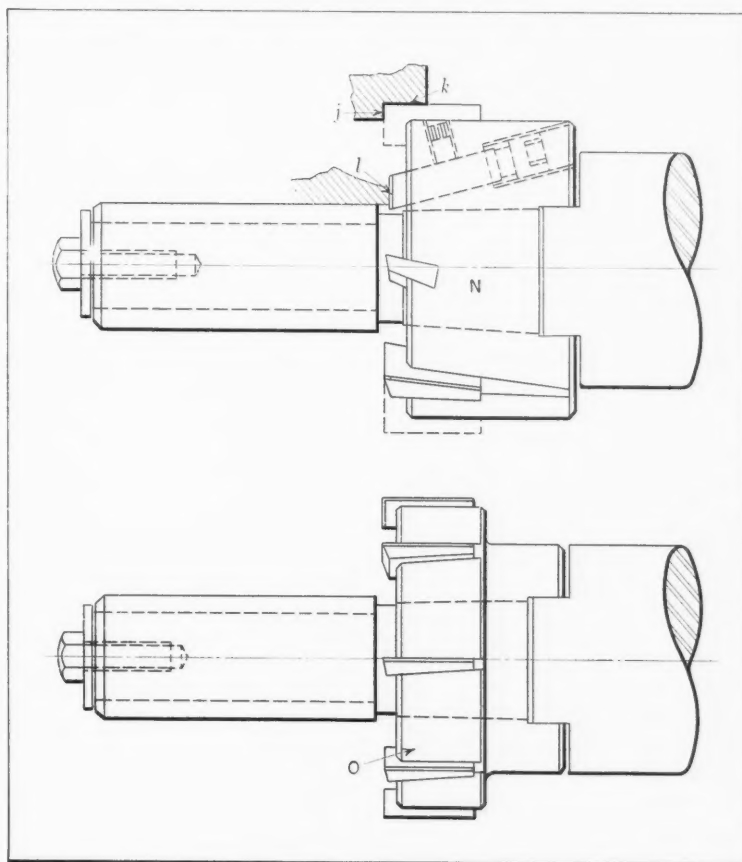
Tools Provided for Finishing Surfaces *j*, *k*, and *l* of the Pump Bowl Casting
